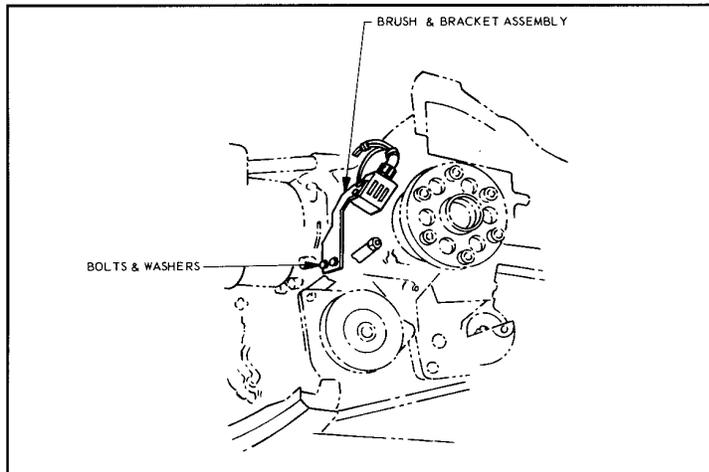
Typical Brush Assembly Mounting Bracket Installation
